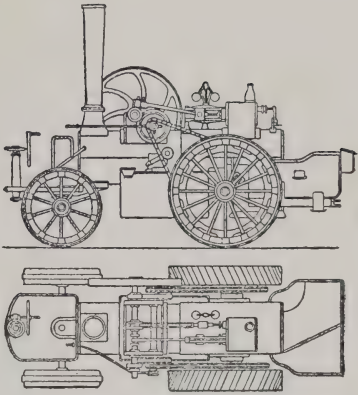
BOYDELL'S ENGINE WITH HORSE STEERING.
